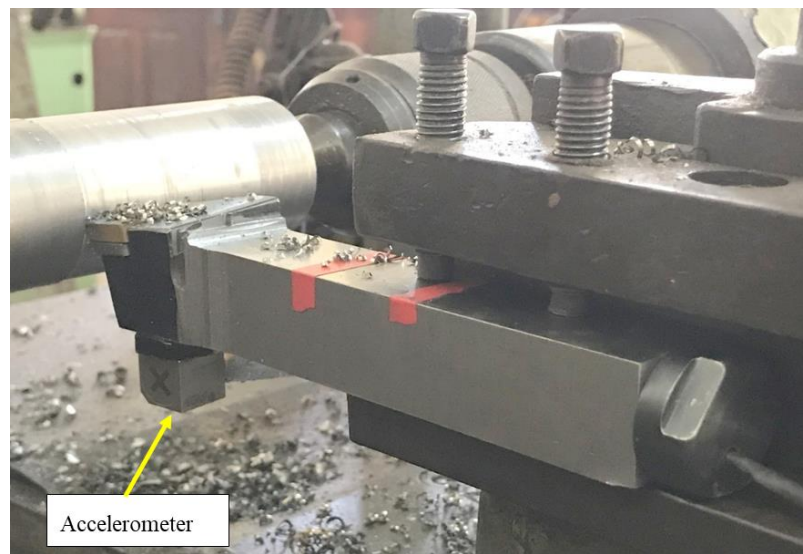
Close-up view of the tool holder secured on the lathe, accelerometer mounted under tooltip to acquire tool vibration.
